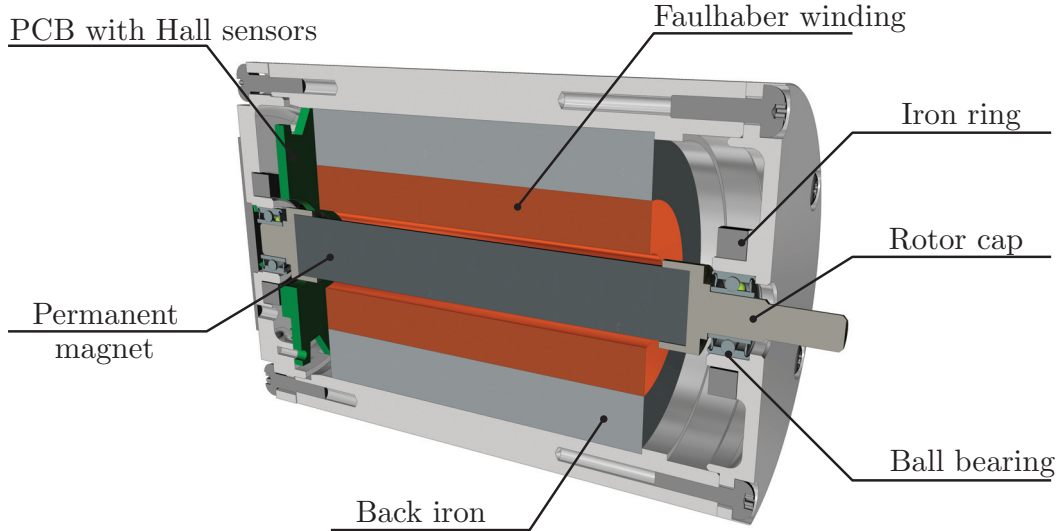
3D cross-sectional view of the prototyped machine.
